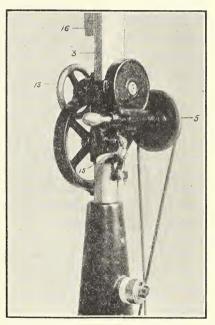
Detail of lower portion of machine shown in Fig. 11
